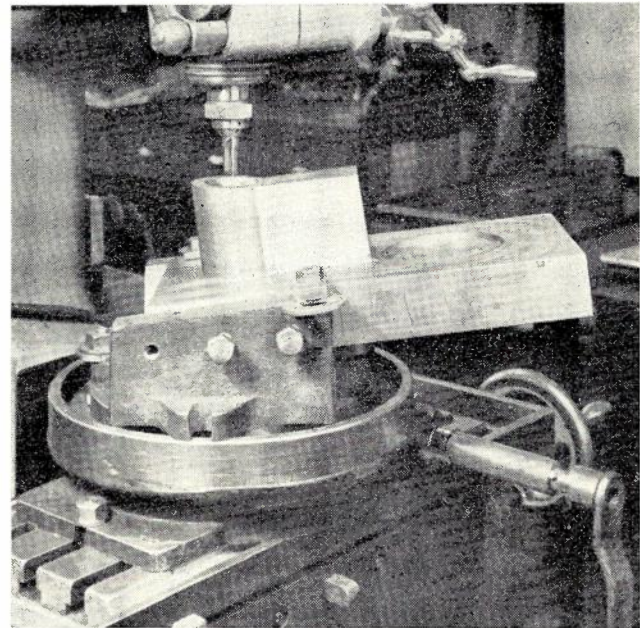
Dial Housing Component. Top force "set up" in vertical miller.
